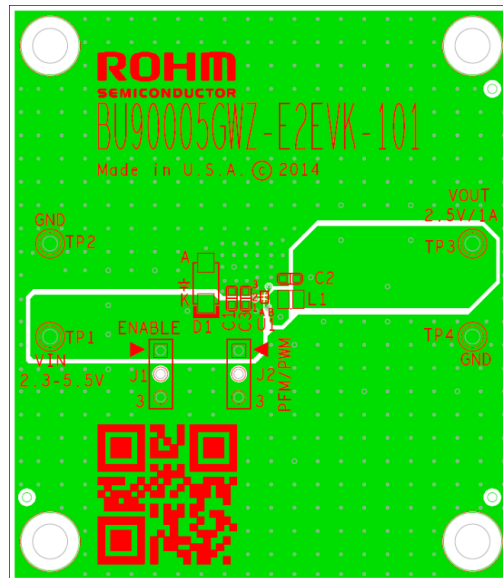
BU90005GWZ-E2EVK-101 Board Layout
